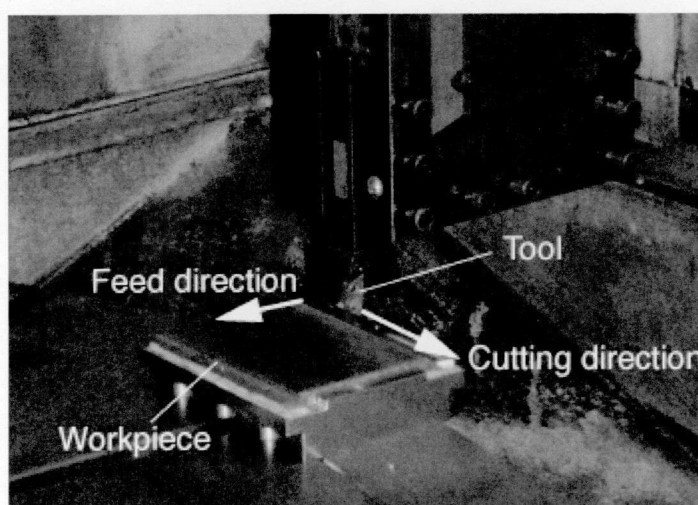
Photograph of test specimen and tool on the lathe machine.
